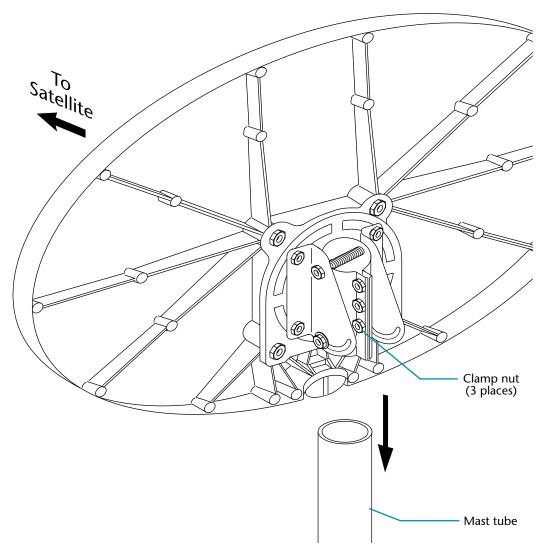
Installing antenna/cap mount assembly onto pole mount
